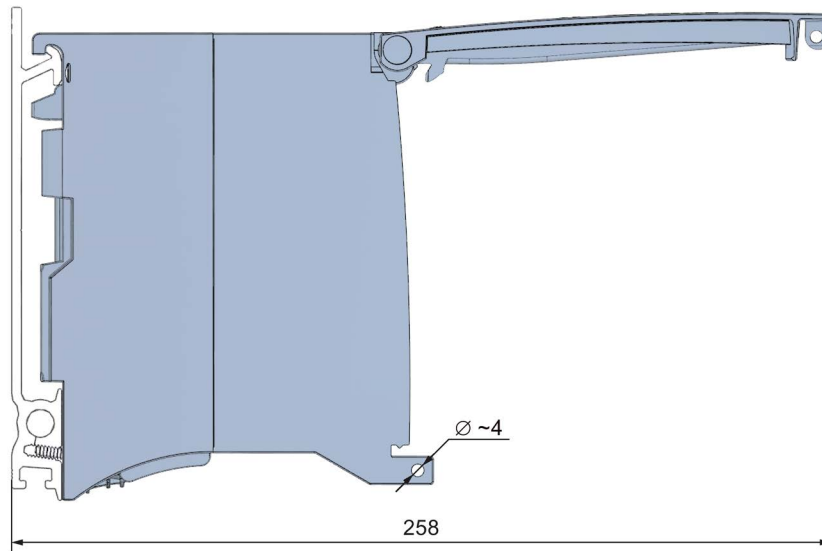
Dimensional drawing of CPU 1513-1 PN, side view with front panel open
